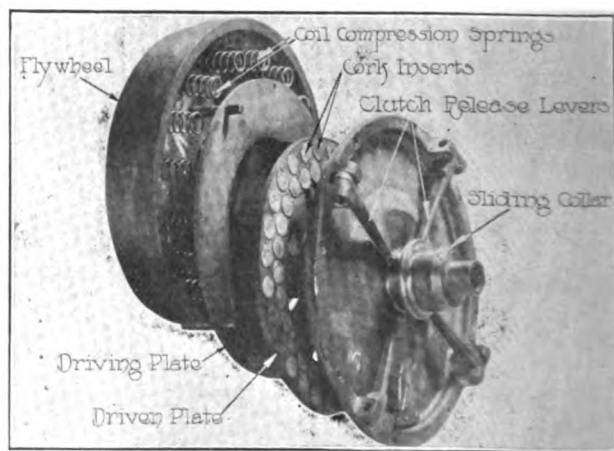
Form of Clutch Utilizing Cork Inserts to Minimise Harsh Engagement.
